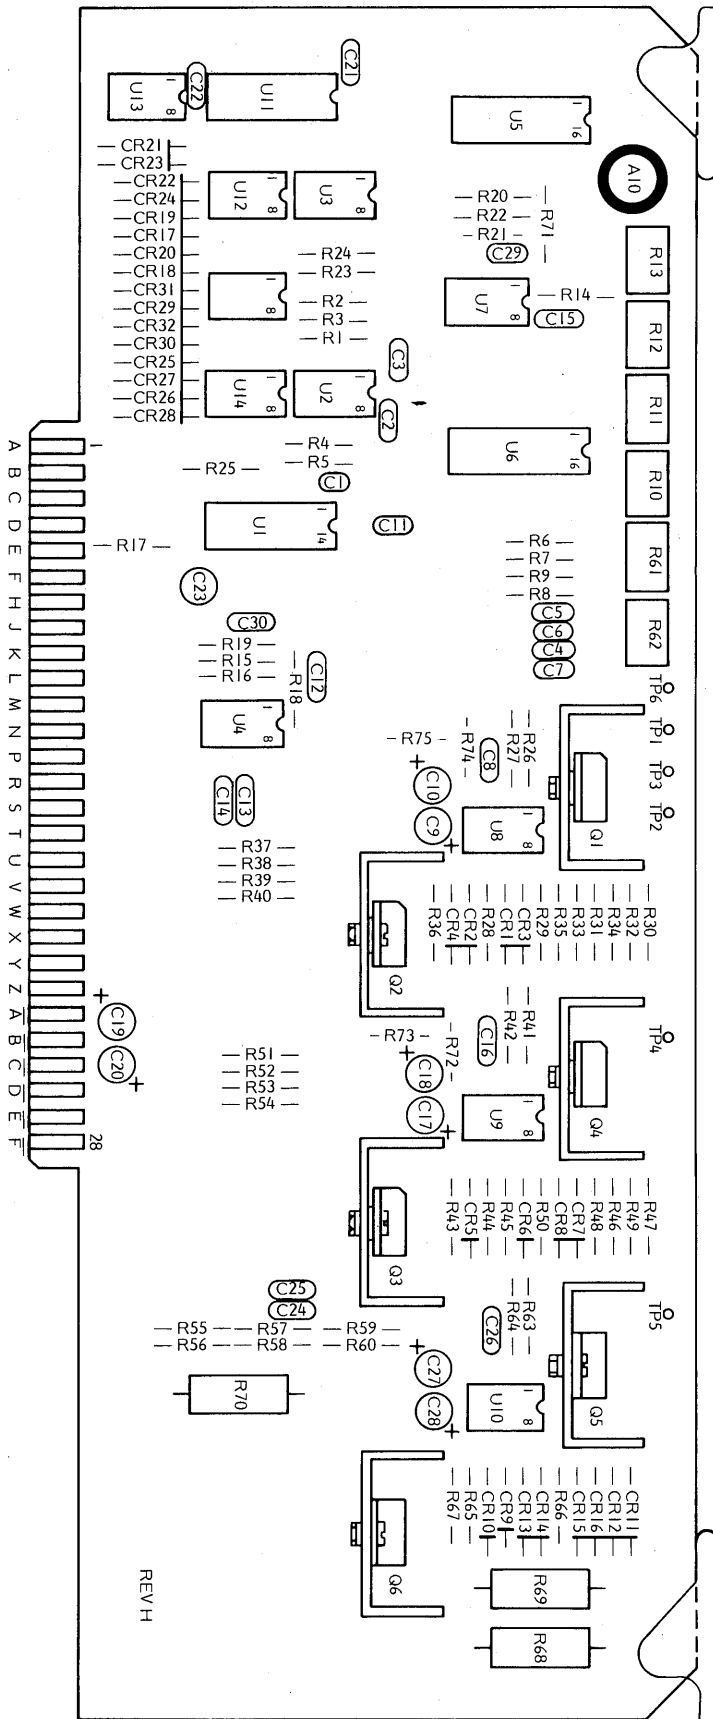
A10 FM/Attenuator PCB Schematic (Sheet 1 of 2)
